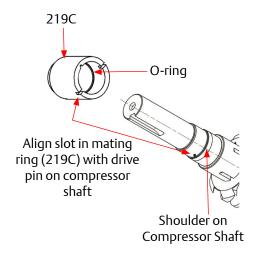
The Alignment of Compressor Shaft and Mating Ring
